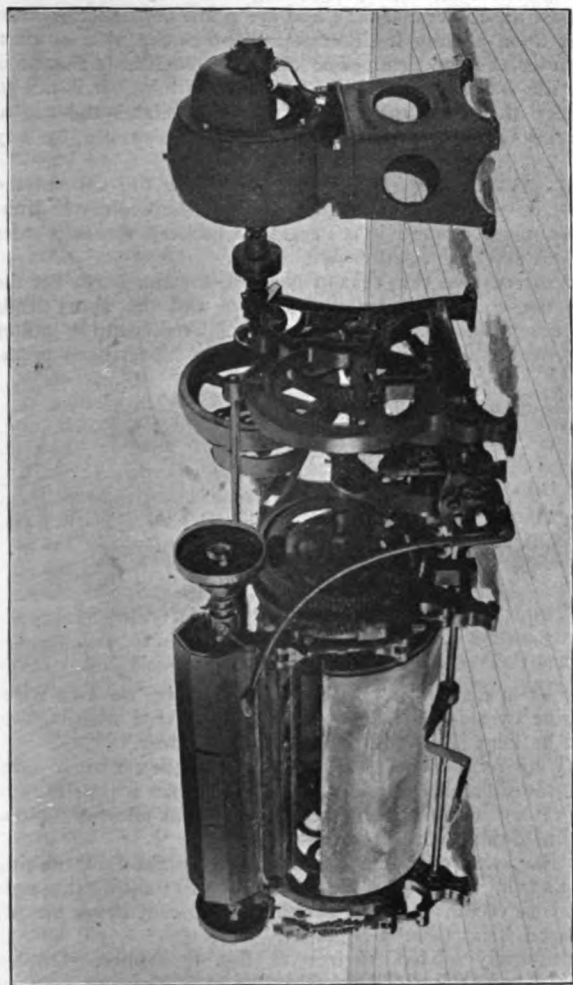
NORTHERN STEEL ENCLOSED MOTOR, DIRECT CONNECTED TO LARGE VAUGHN FLESHING MACHINE.
